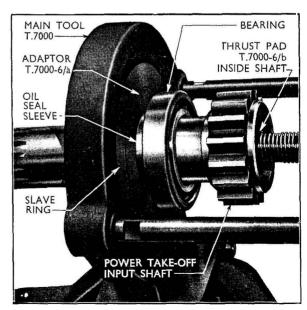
Replacing Bearing and Oil Seal Sleeve on Power Take-Off Input Shaft
